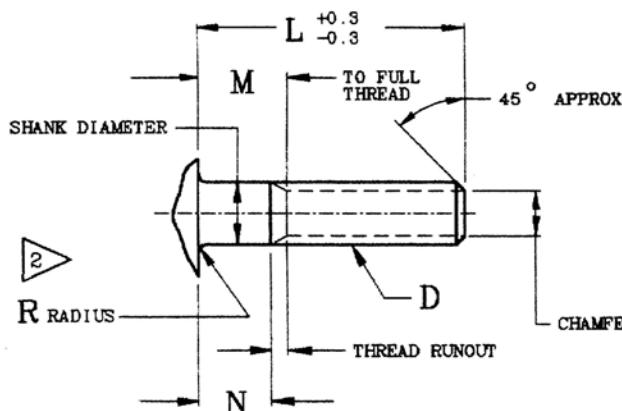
A - COARSE TOLERANCE-FULL SHANK
